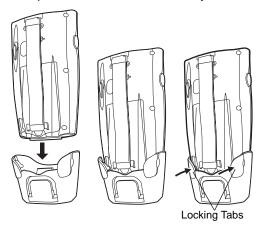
Attaching the Universal Cable Cup to the Terminal
